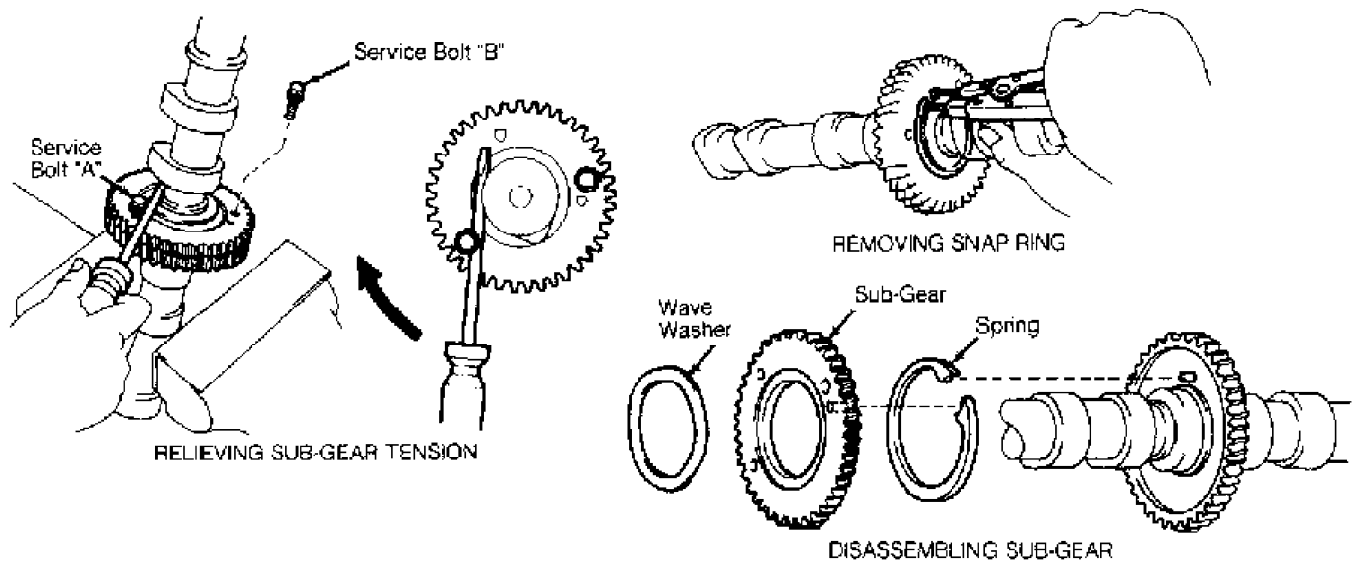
Installing & Removing Camshaft Sub-Gears
